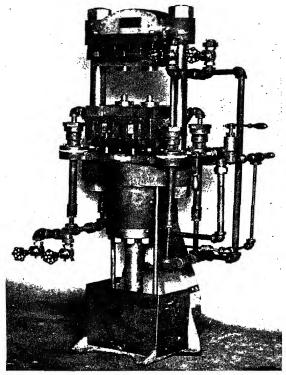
Small semiautomatic press with lower platen movable. Note slip-joint steam connections to lower dies, and steam and water valves.
